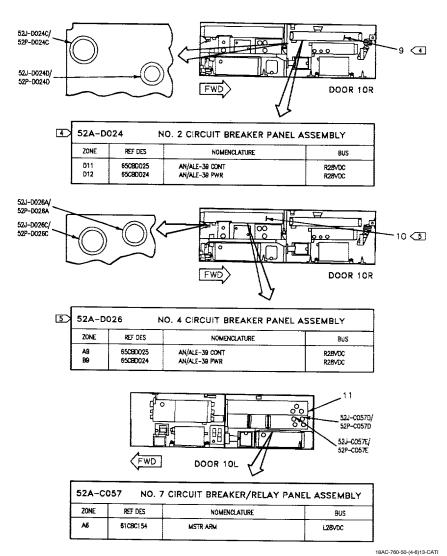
Countermeasures Dispensing System Locator (Sheet 6)
